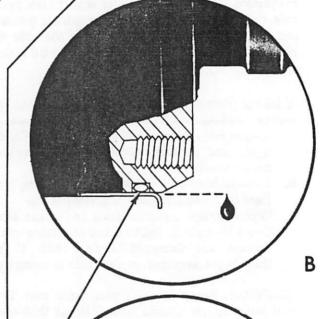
L-8 Power Steering Pump Leak Diagnosis and Corrective Action
